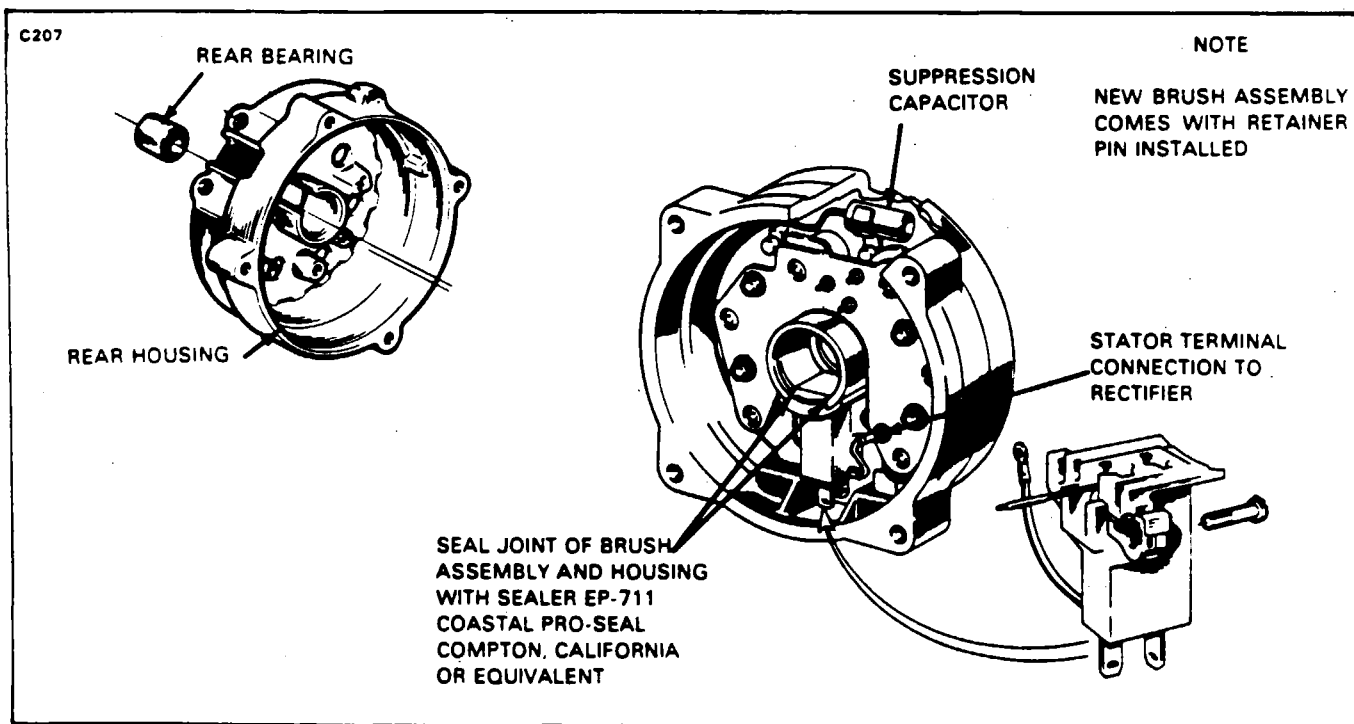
Rear Housing Bearing and Brush Assembly Installation
